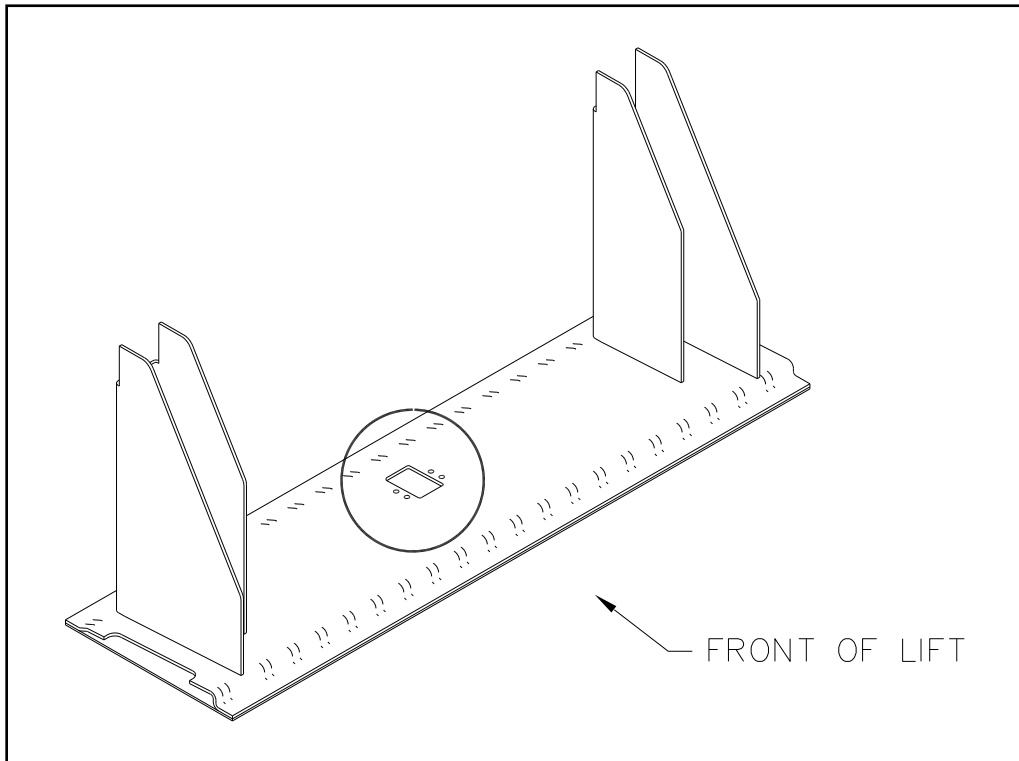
STOW-LOCK CUTOUT LOCATION (DETAIL NOT SHOWN FOR CLARITY)
